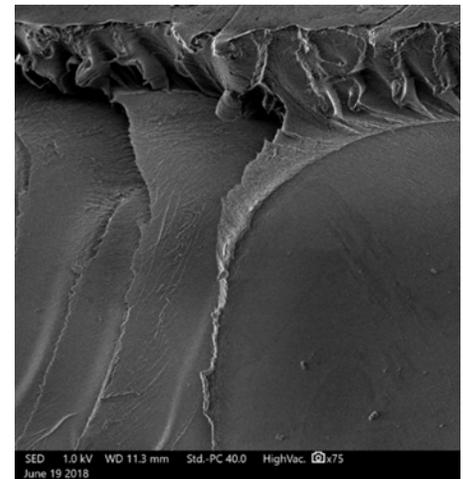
Fracture surface of a CPVC pipe that has failed due to environmental stress cracking (ESC).
